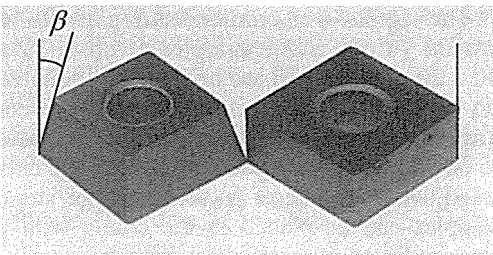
Rectangular prism tools: 4-edge tool (left) and 8-edge tool (right).
